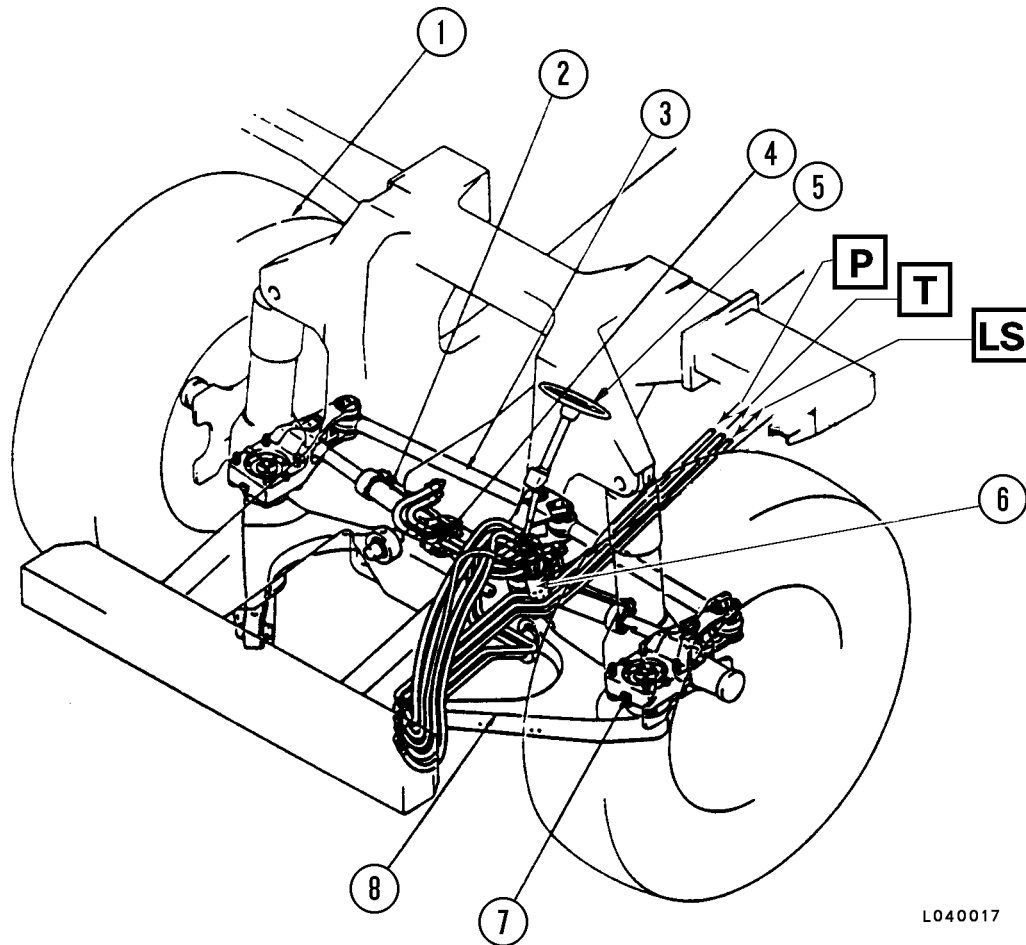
STEERING SYSTEM COMPONENTS
